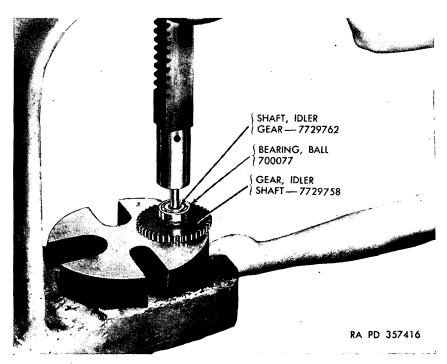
Pressing idler gear shaft out of idler gear and bearing.
